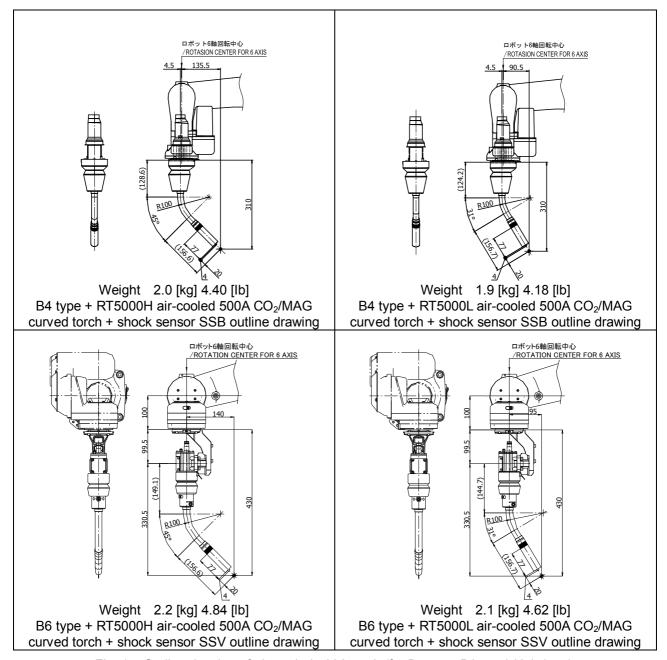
Outline drawing of air-cooled 500A torch (for B4 type, B6 type) Unit (mm)
